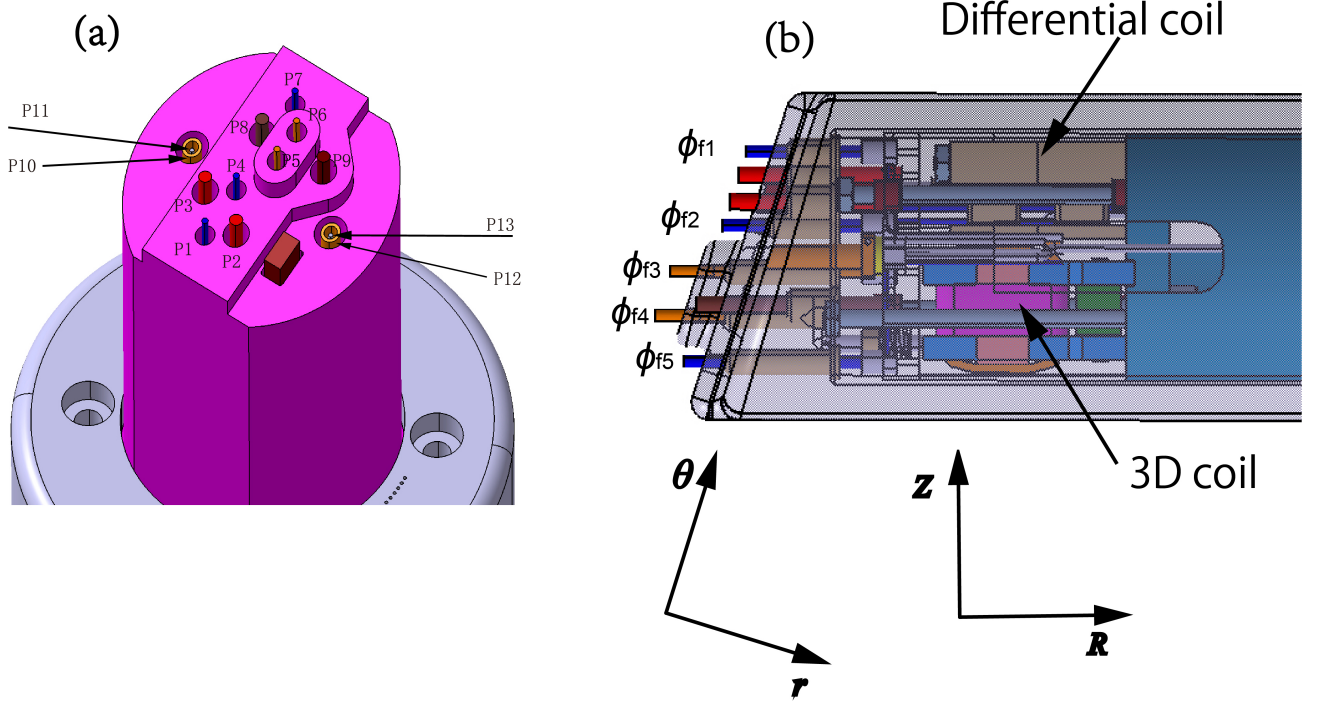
The arrangement of the FZJ-COMB2 probe head. (a) Sketch of probe pins; (b) Side view of probe head.
